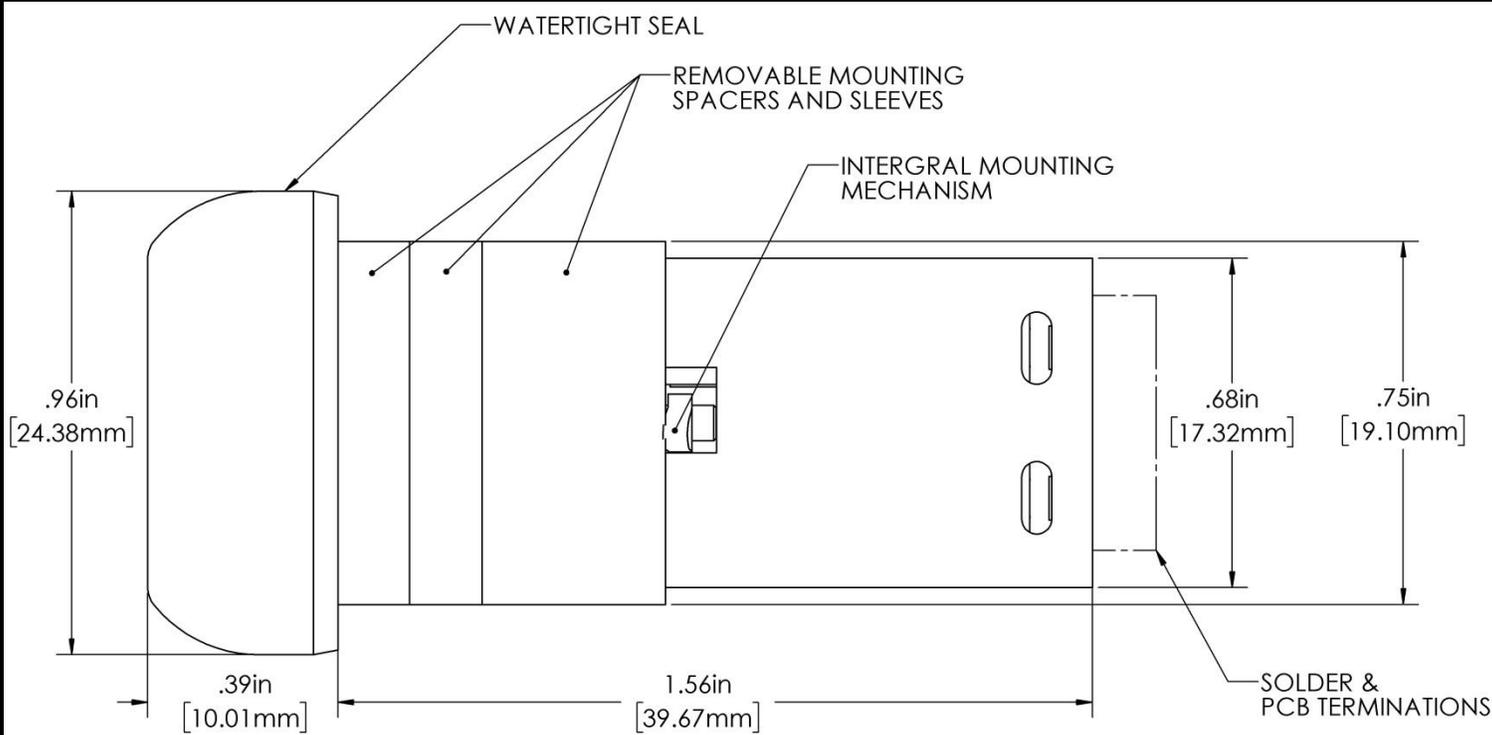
Splash-Proof/Watertight switches – Enclosure Type III solder and PCB terminations (side view)
